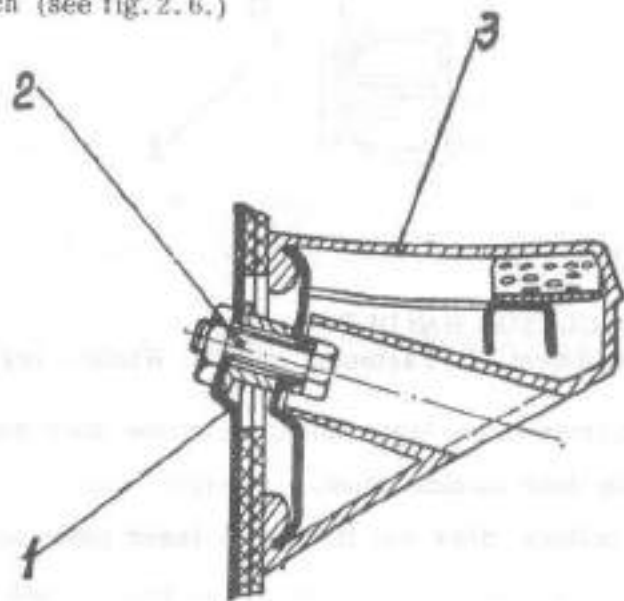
ARM-REST FASTENING ON THE DOOR PANEL.
